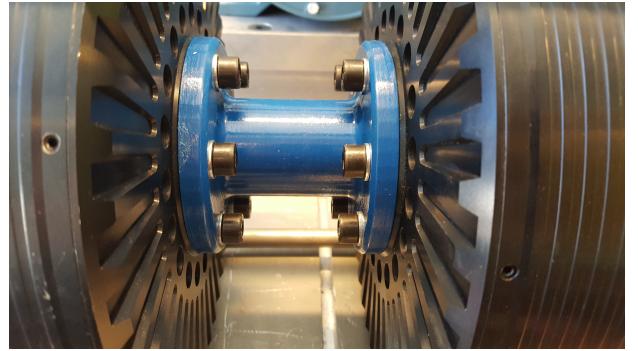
A 3D print prototype was developed, but proved insufficient in precision
